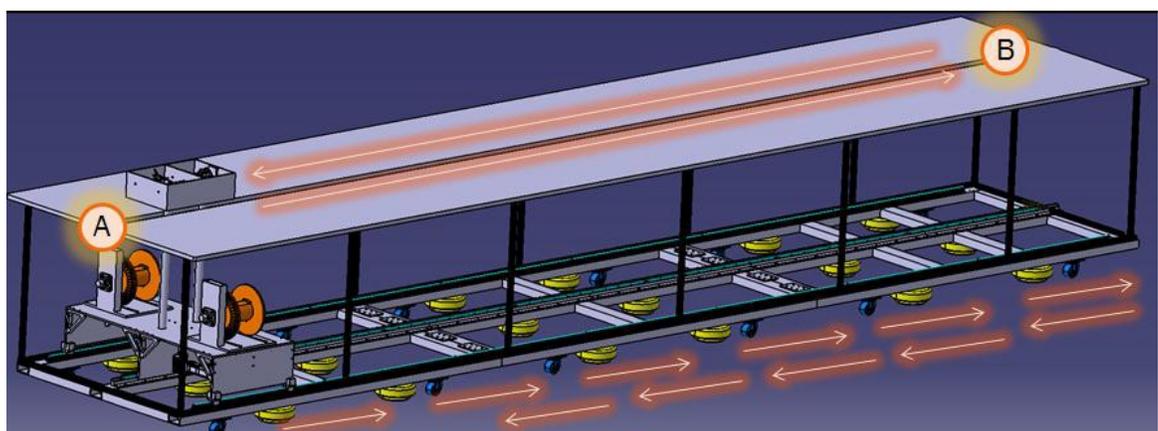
The Final Design of the Compliant Wind Machine Shown with A Representing the Initial Position and B Presenting the End Position
